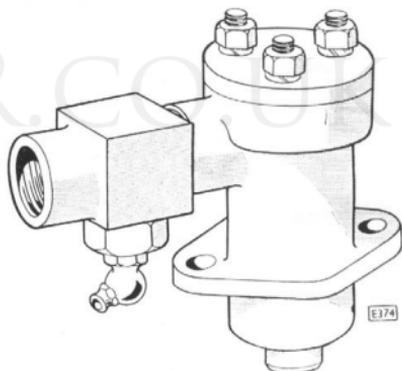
Throttle control motor piston and cylinder assembly showing lubricator.
